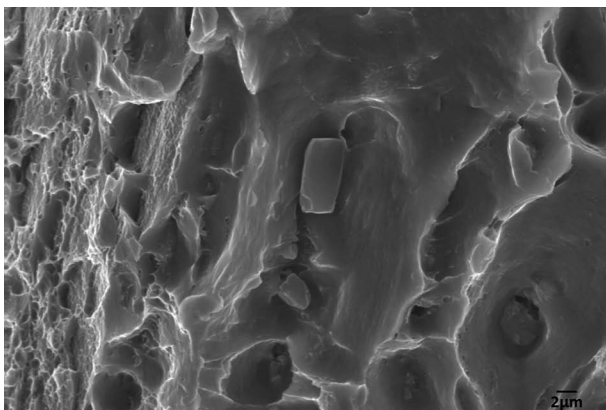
High magnified image of the fracture surface shown in Fig. 202
